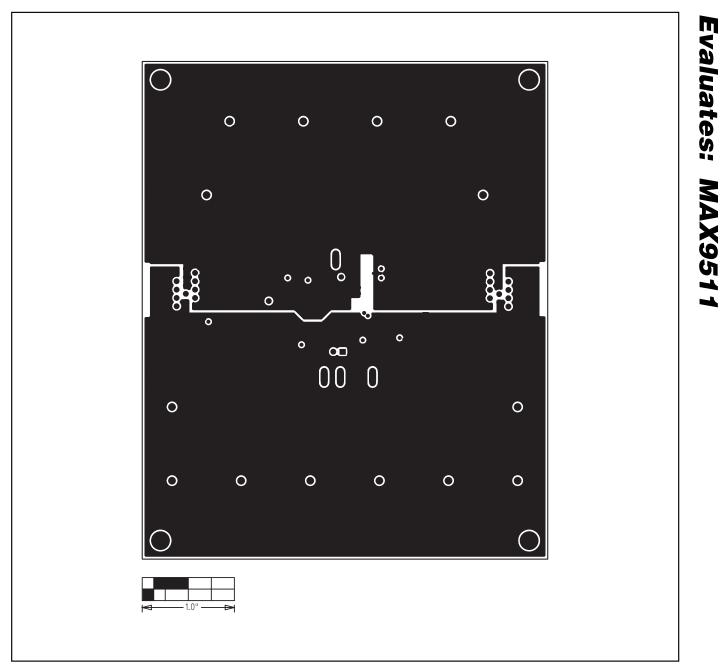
MAX9511 EV Kit PC Board Layout—GND Layer 2
